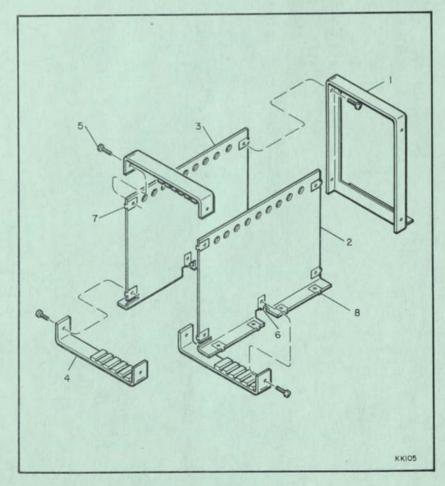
BACKBOARD FRAME ASSEMBLY
